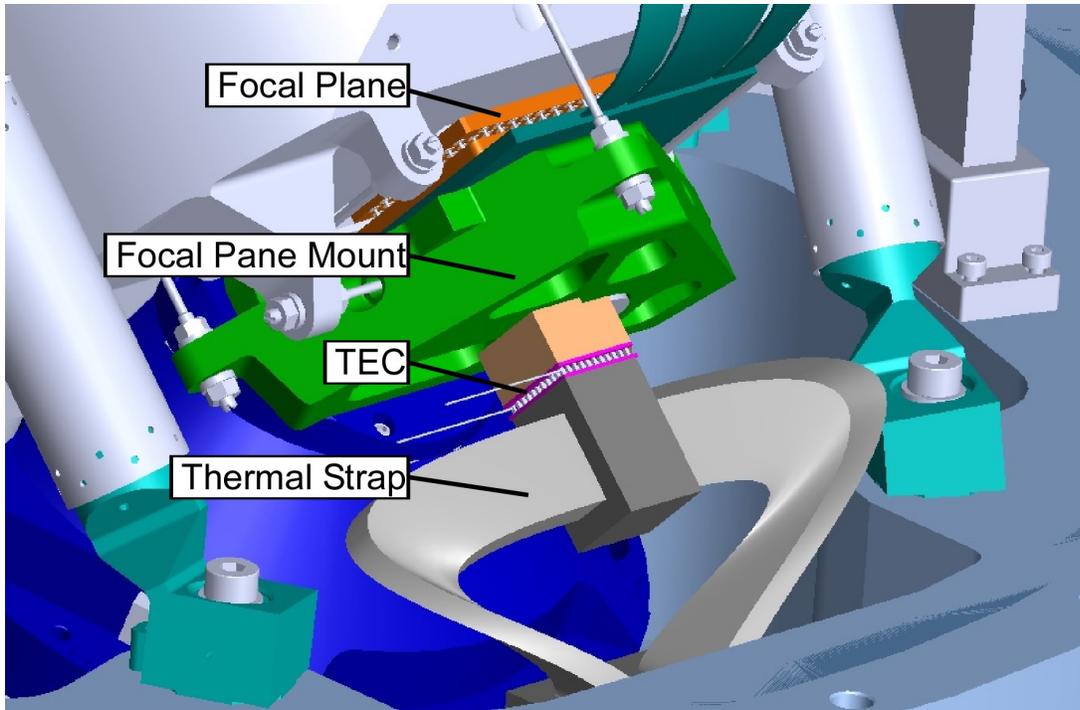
TAFTS and focal-plane mount assemble on a CAD molde of the PRISM instrument.
